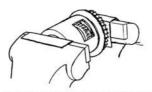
Illustration showing use of Yanmar special tool 17095-09070 to compress Believille springs so snap ring may be detached.
